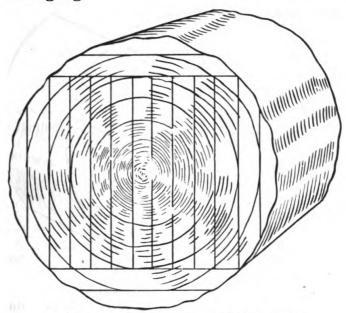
Plain, "flat," or "slash" sawing.
